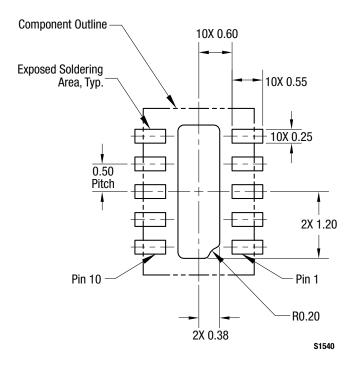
SKY13322-375LF PCB Layout Footprint (Top View)
